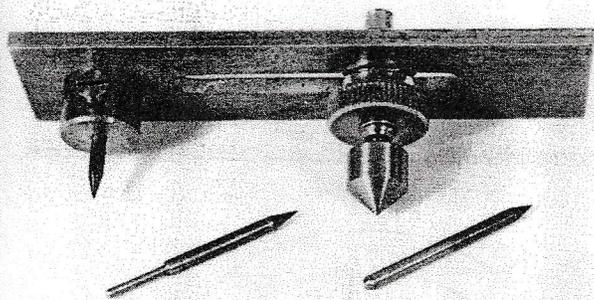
Showing the depth tool. A trumpet runner is fitted in the movable bush.
